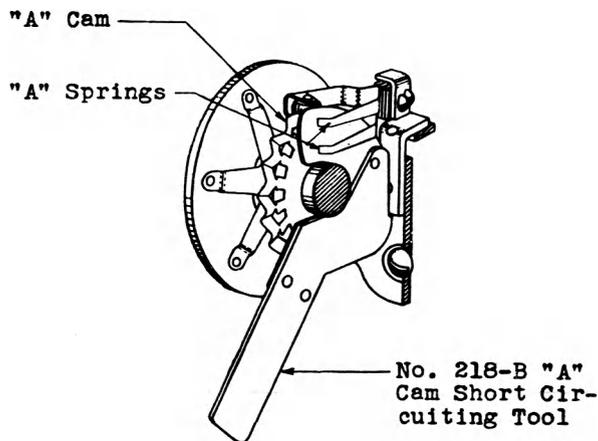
Method of Rotating Interrupters Electrically by Means of the No. 218-B "A" Cam Short Circuiting Tool
